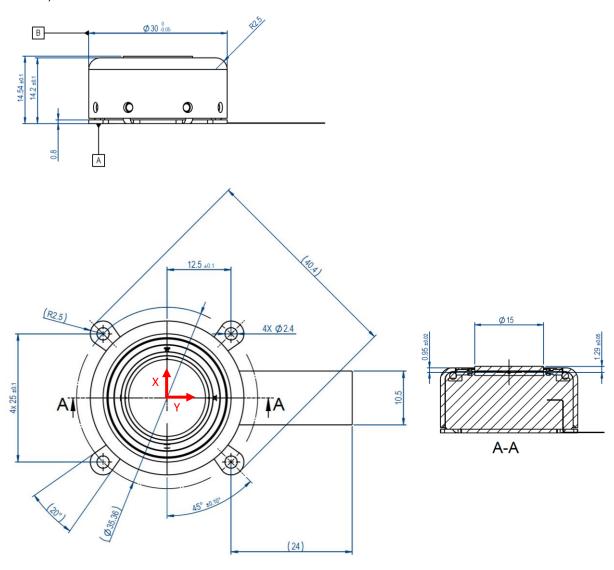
Mechanical drawing of the MR-15-30 (unit: mm). The red arrows show the definition of the mirror axes.
